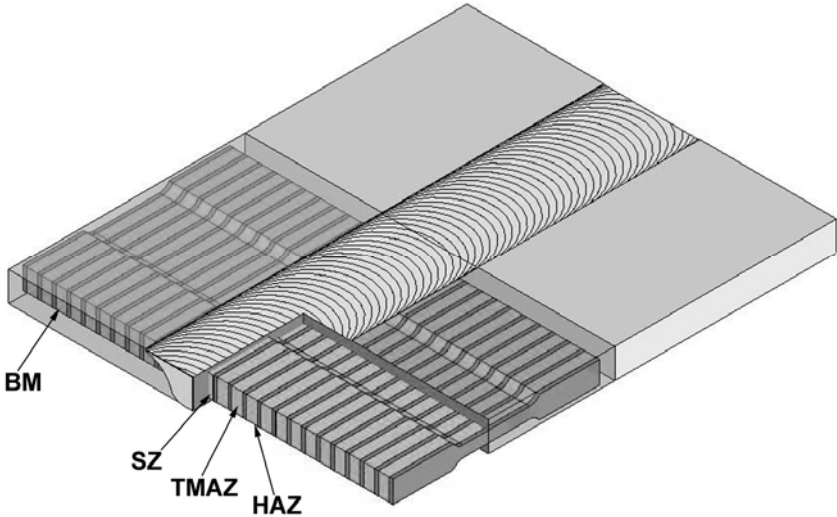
Schematic illustration of the microflat specimens obtained. Weld joint representation with the specimen’s disposition along the weld joint, indicating the corresponding weld zone and base material.
